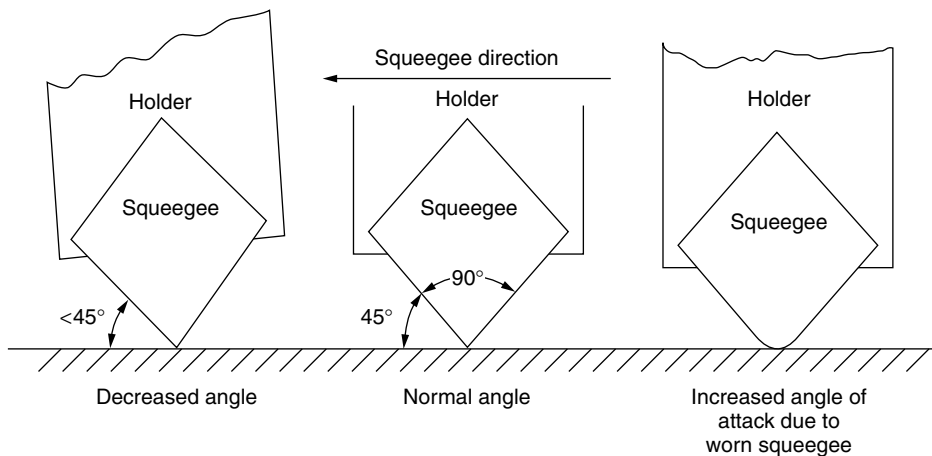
Squeegee wear reduces contact angle and scooping during printing [12]
